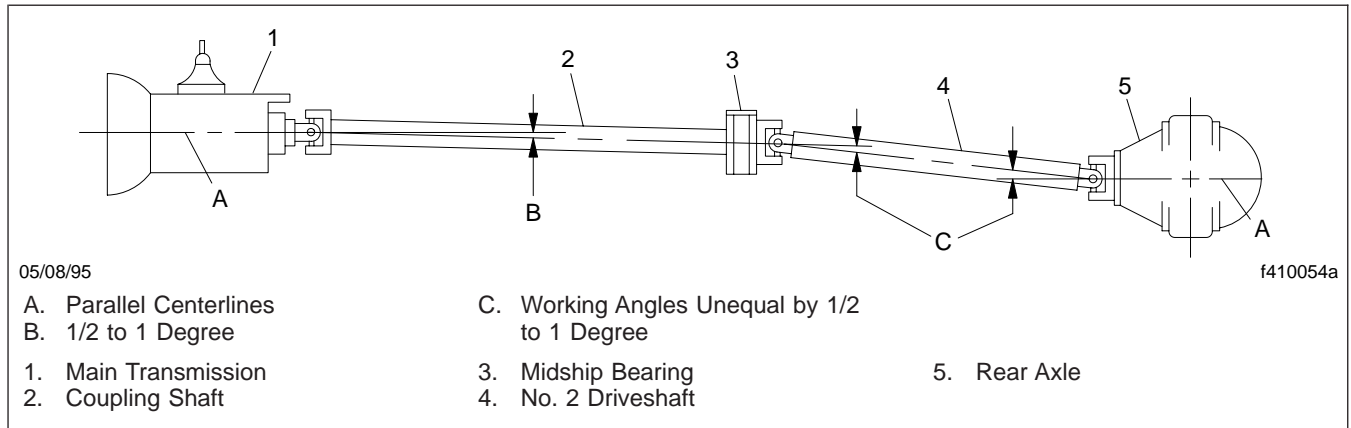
, Midship Bearing in a Single-Drive Vehicle
